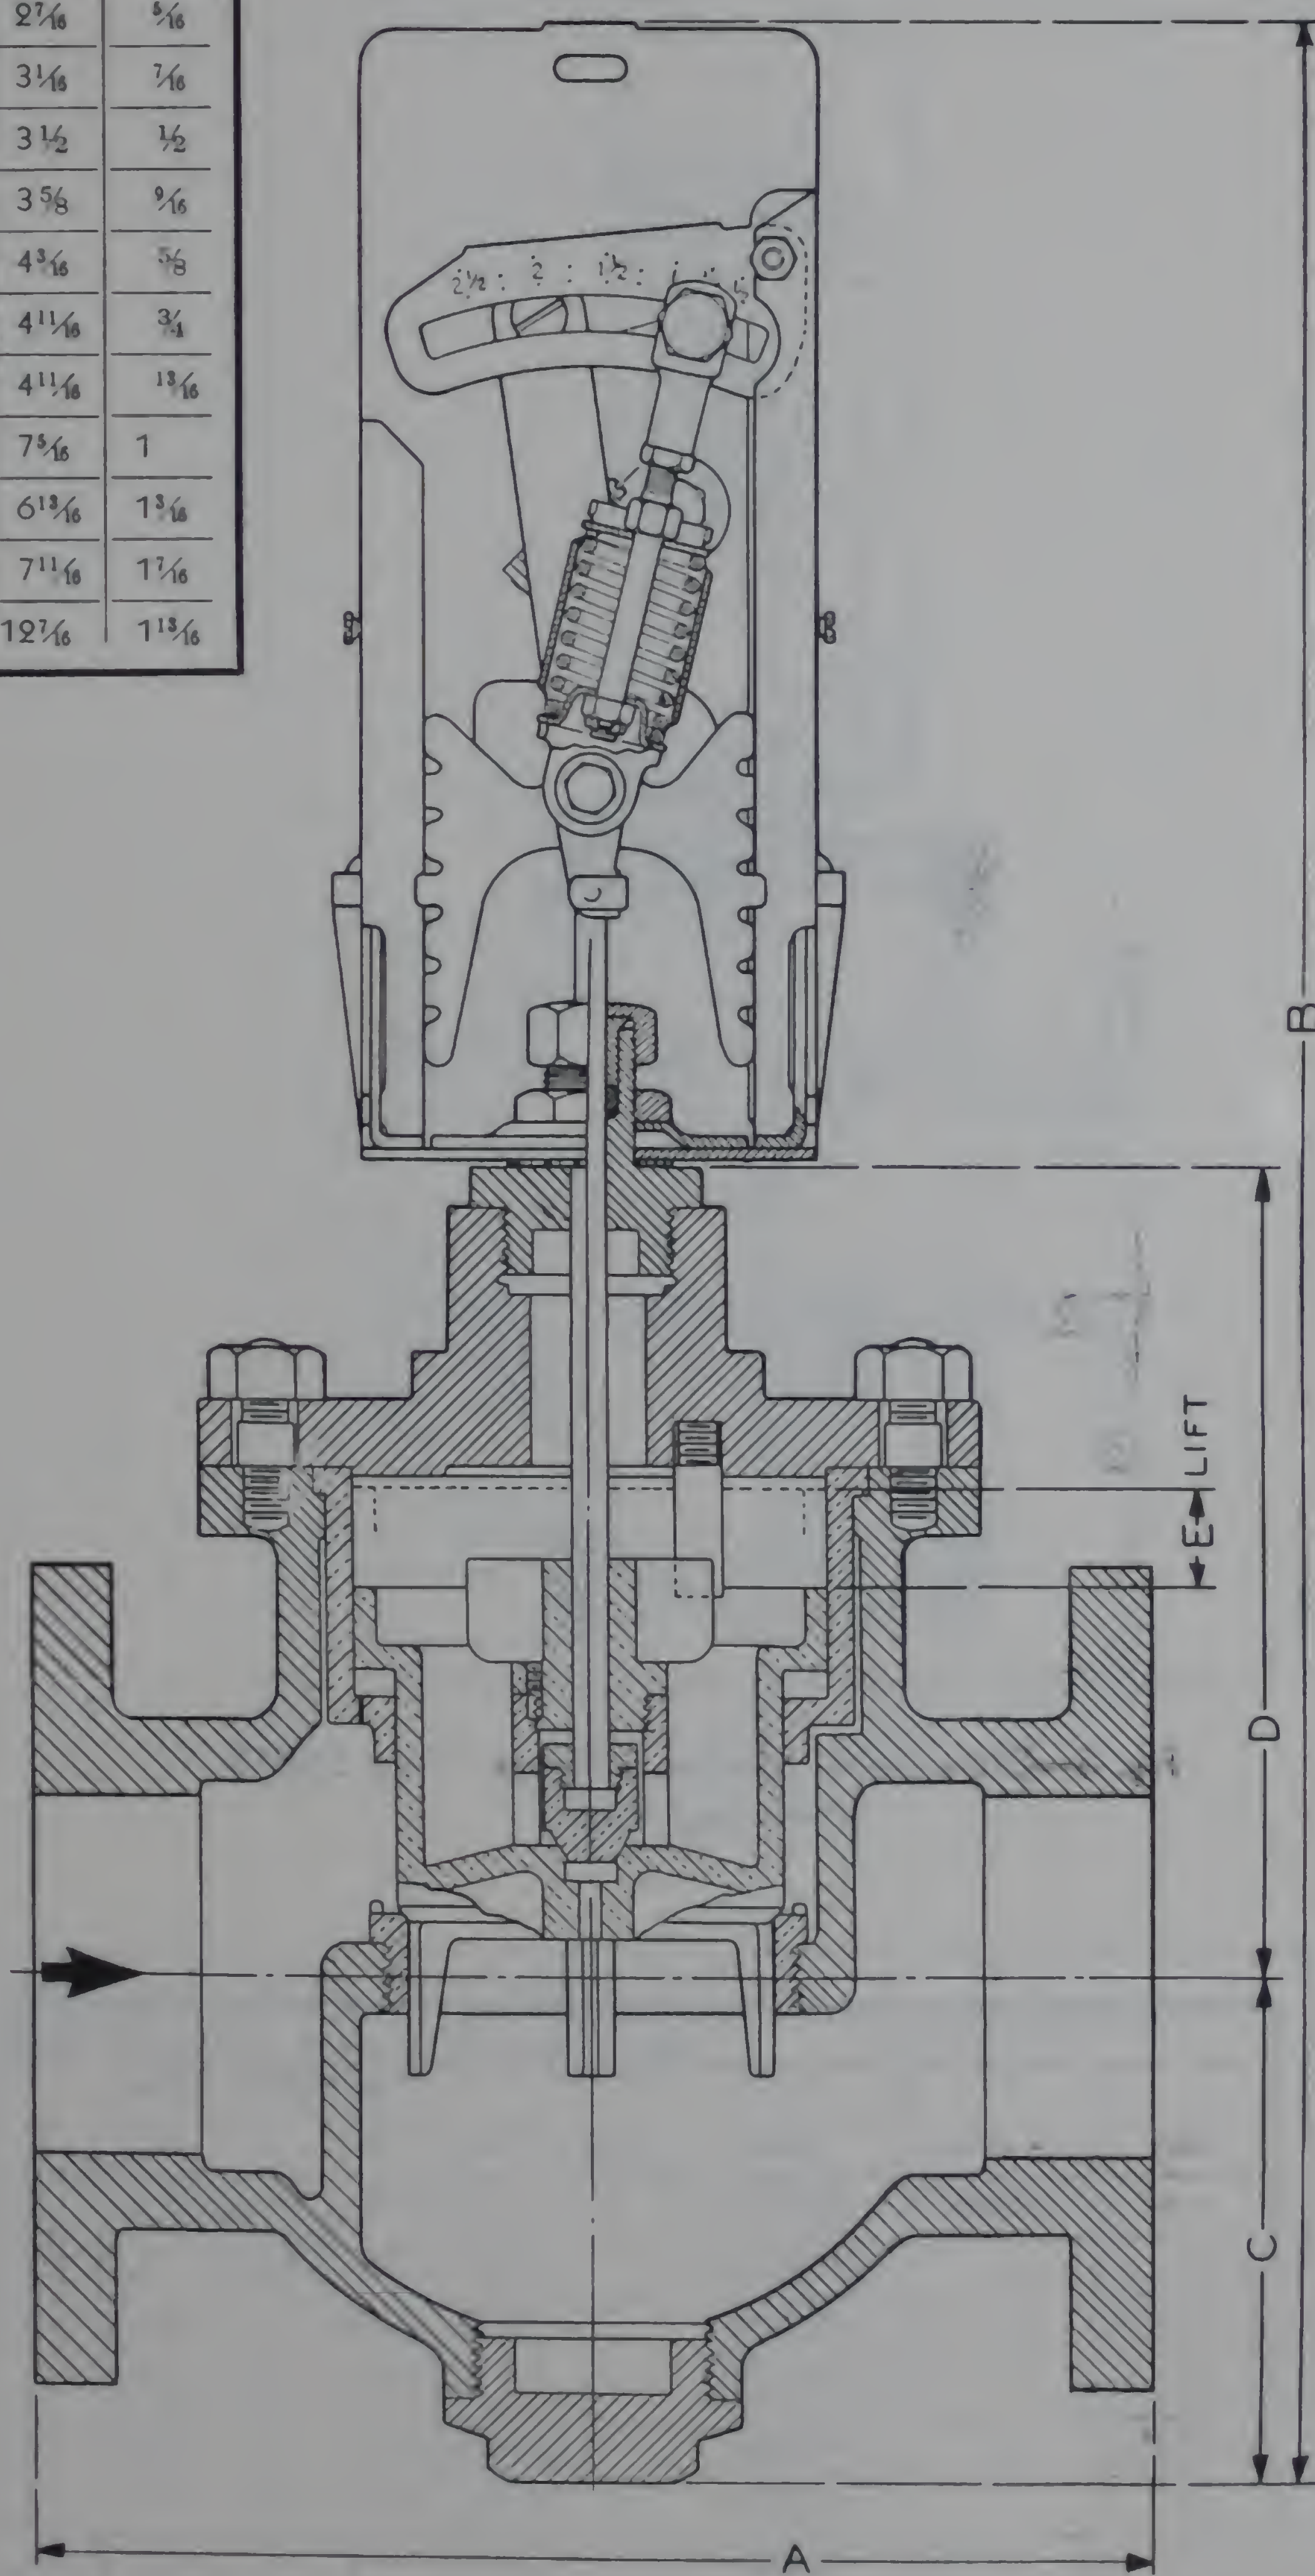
Dimensional drawing of Type K202C Motorized Valve with V58C valve body.
